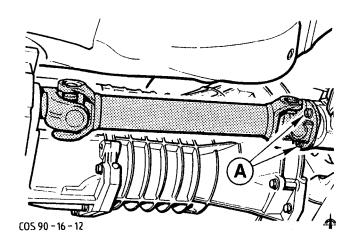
Driveshaft to front axle. A - 2 retaining bolts (2 concealed)
